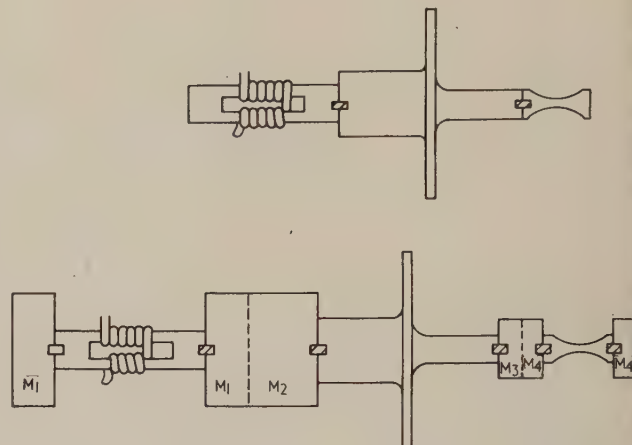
Vibrator assembly for fatigue testing at variable frequency
